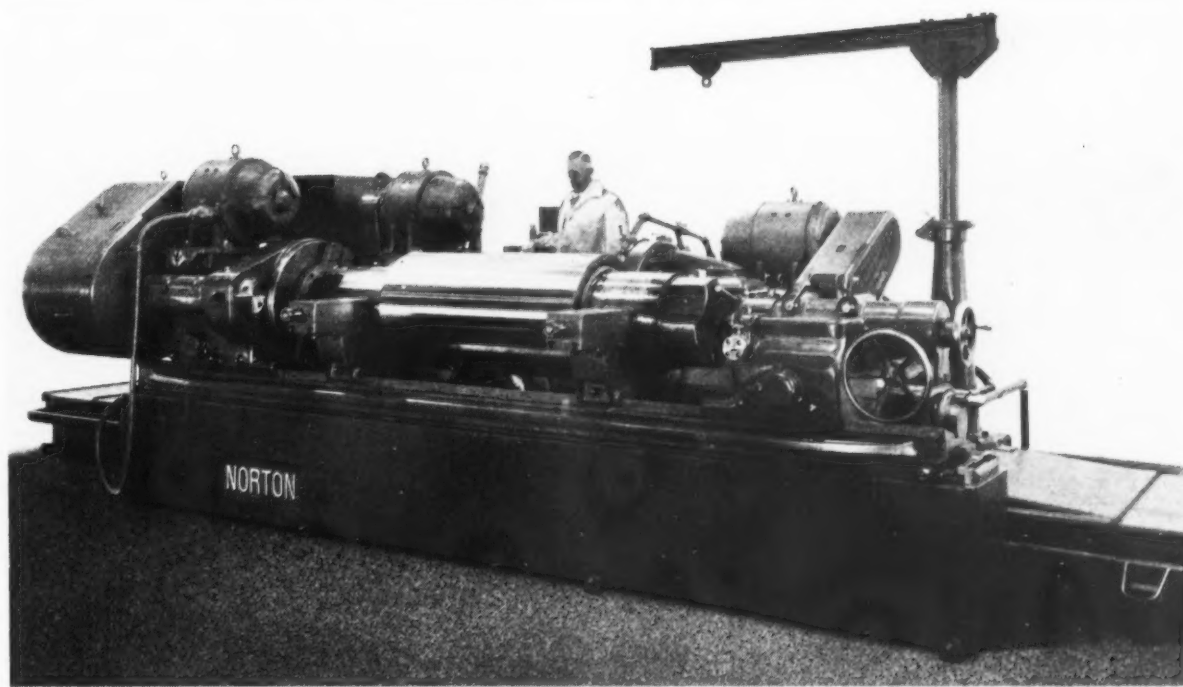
Norton Grinding Machine Designed Primarily for Finishing the Rolls of Mills that Produce Steel Sheets for Automobile Bodies and Fenders
